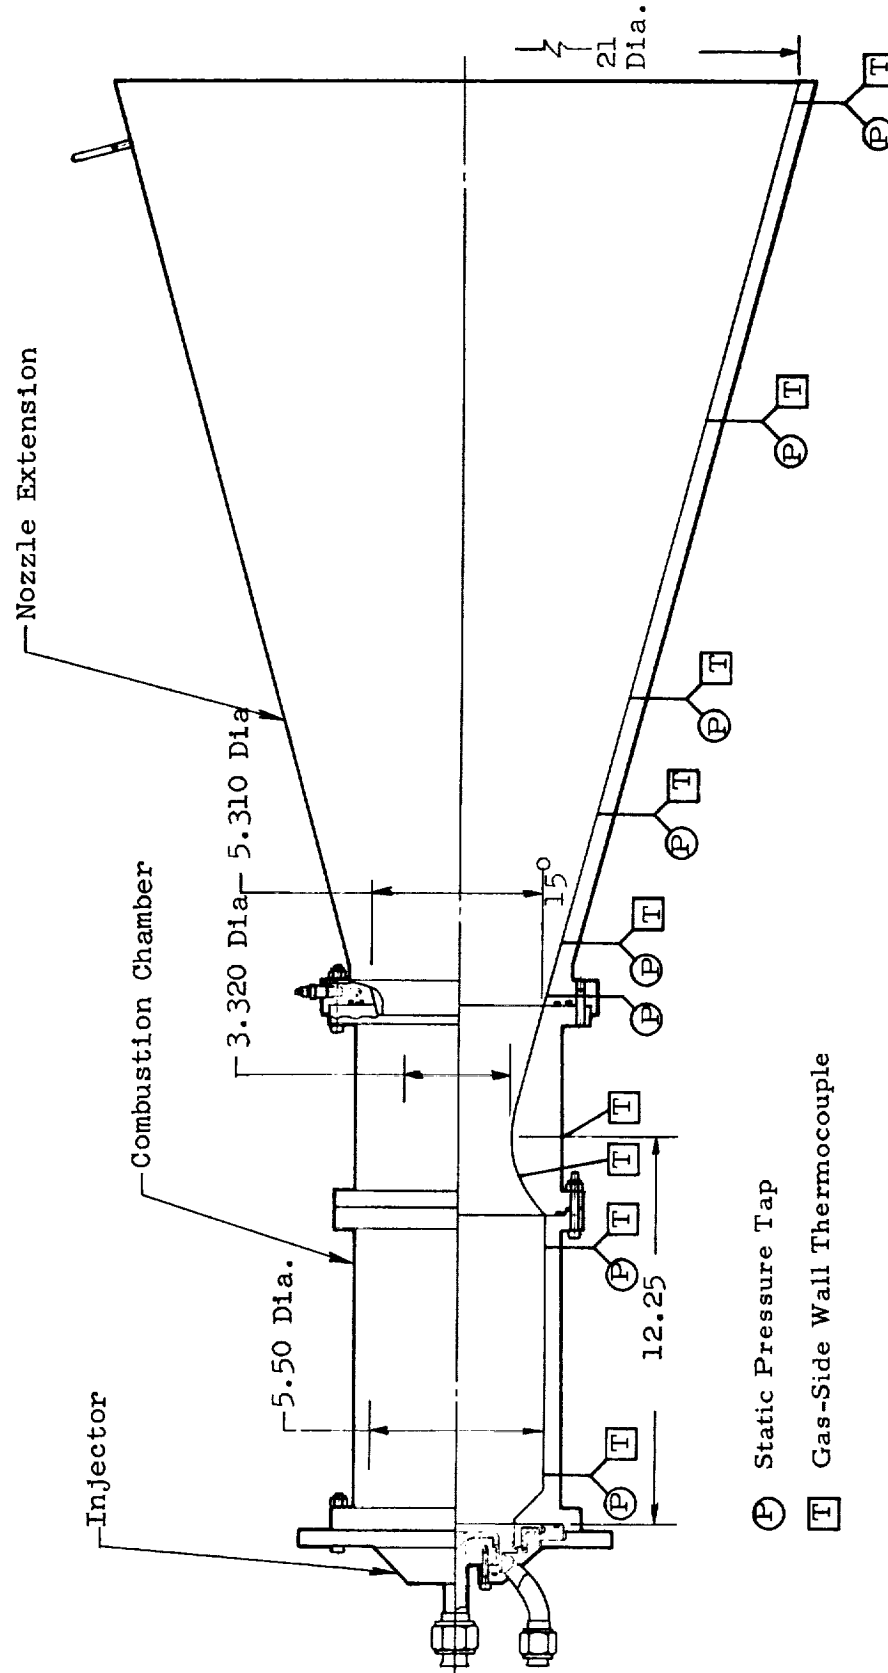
Altitude Evaluation Thrust Chamber and Nozzle Extension Assembly
